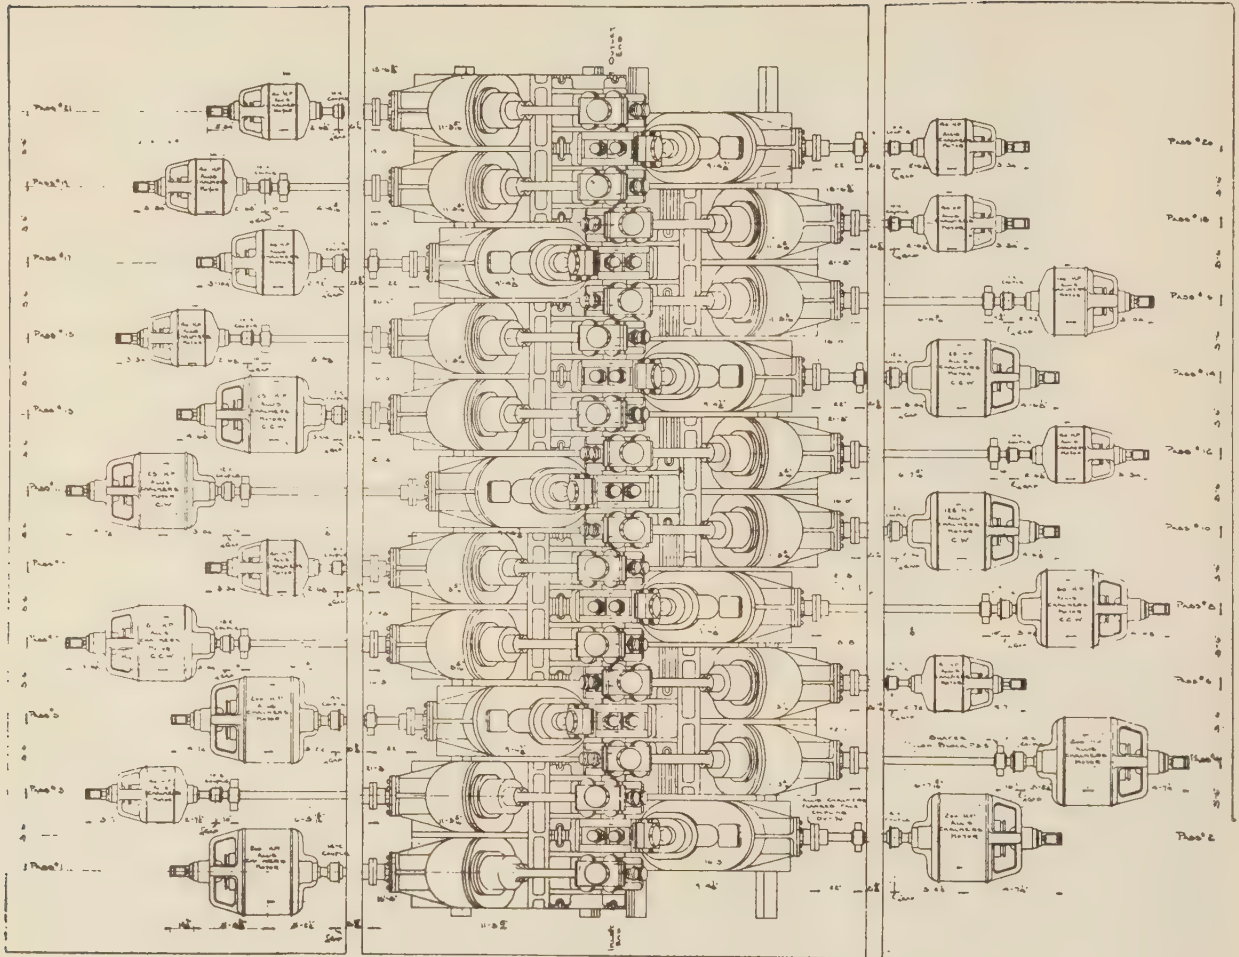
PLAN VIEW OF MILL AS ORIGINALLY INSTALLED
